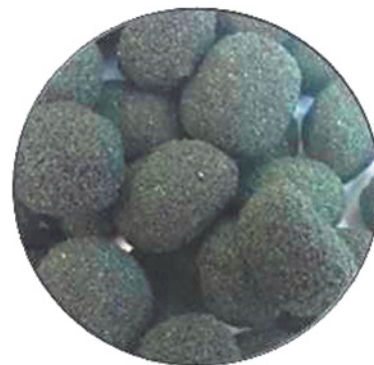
Precursors - Furan moulding mixture (regular shape and size)
